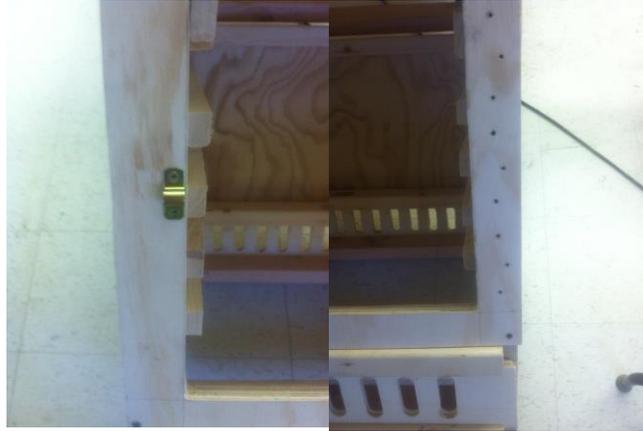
Cut 1" strip to allow shelf supports to be nailed to the 1/4" side panels. We cut a 2x2 lengthwise to 1" thick. Nail in the 1" spacers before nailing in the shelf supports to hold the spacers into place.
